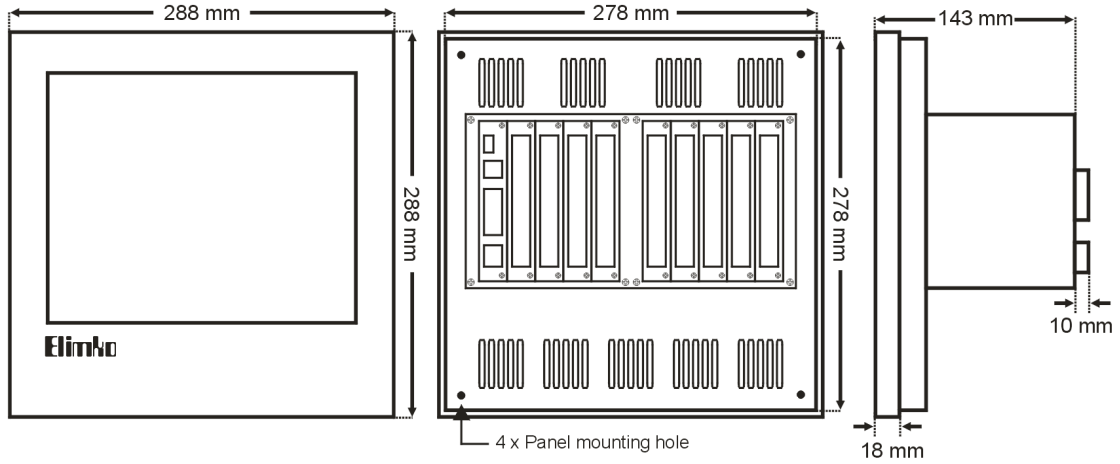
E-PR-200 dimensions and Panel Mounting
